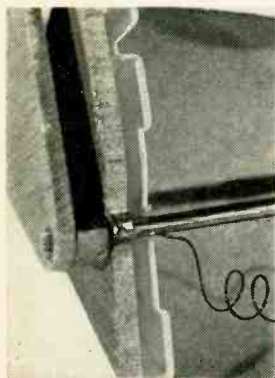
Solder motor wire to eyelet; mount eyelet in end of drive roller with collar out.
